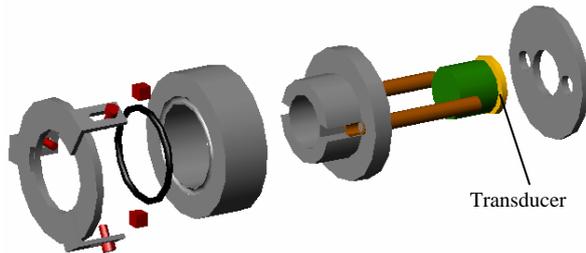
Schematic drawing of the smaller chamber's assembly.
